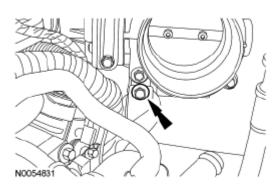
Locating Wiring Harness Retainers Courtesy of FORD MOTOR CO.
